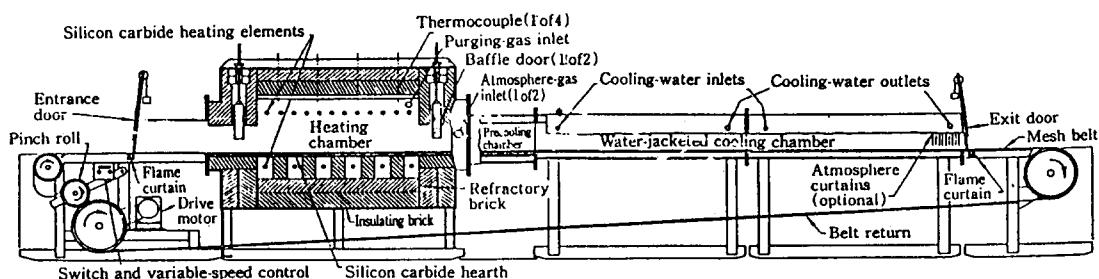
Mesh belt conveyor brazing furnace with a water-jacketed cooling chamber
